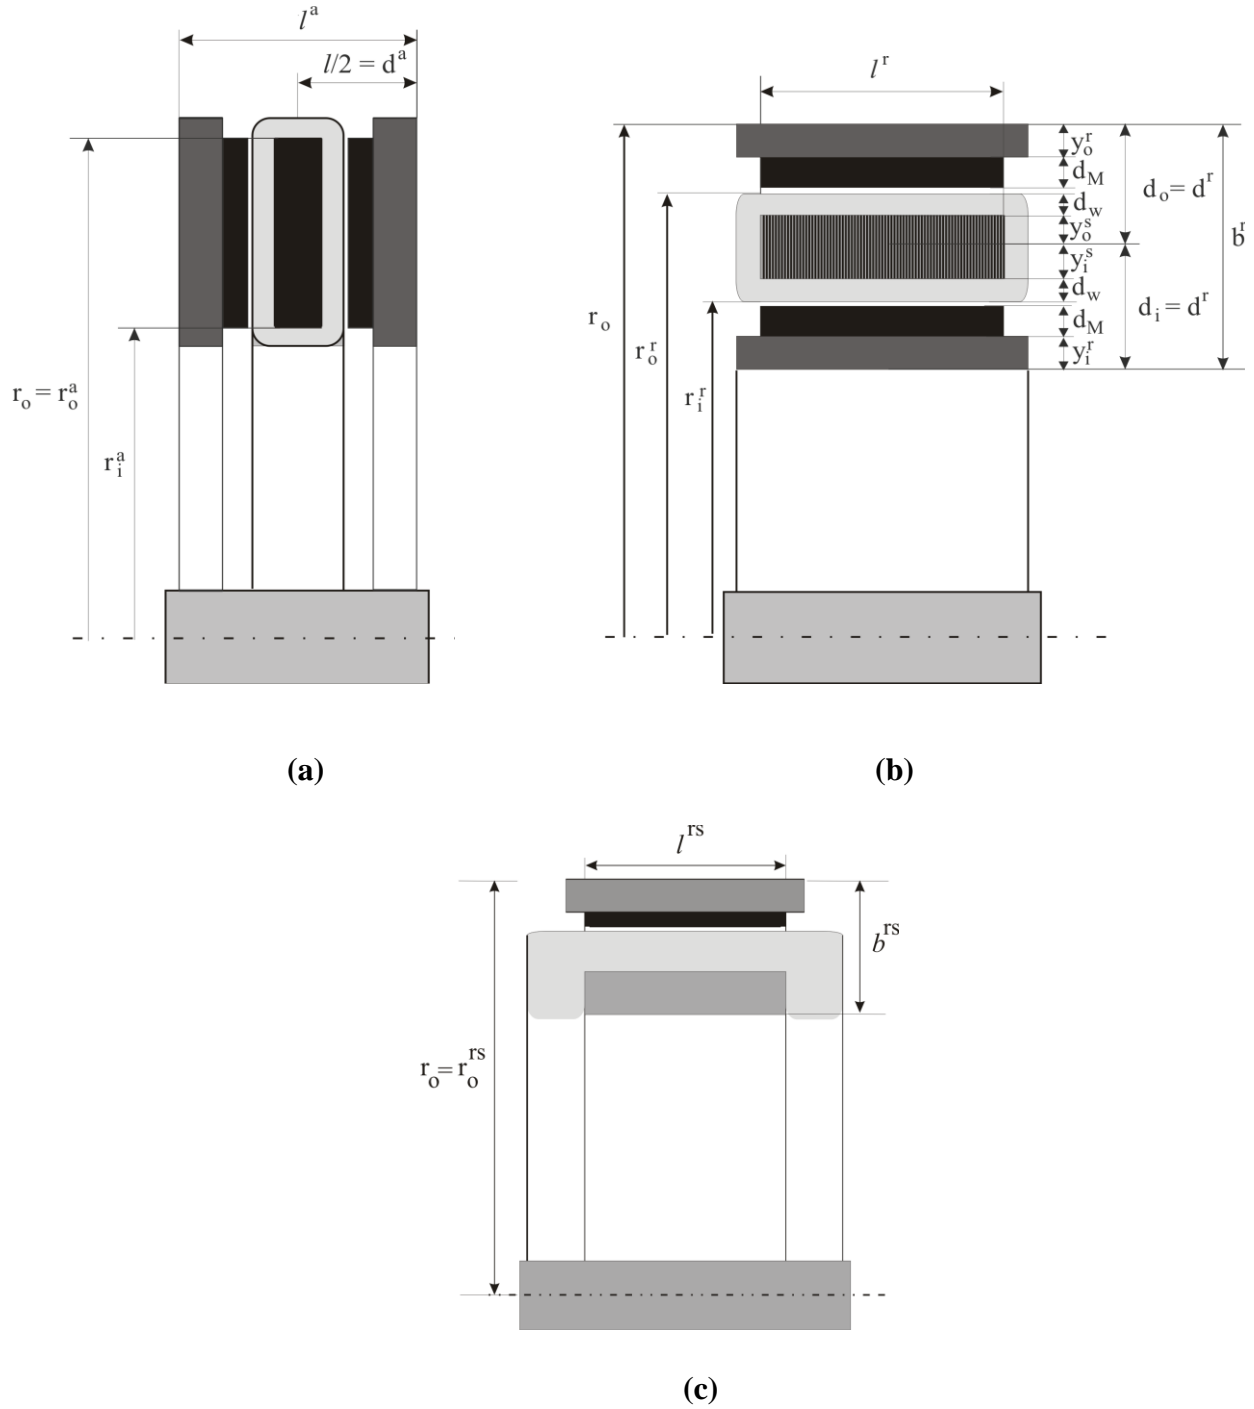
Section of: (a) twin-rotor AFPM motor, (b) twin-rotor RFPM motor, (c) single stage outer-rotor RFPM motor
